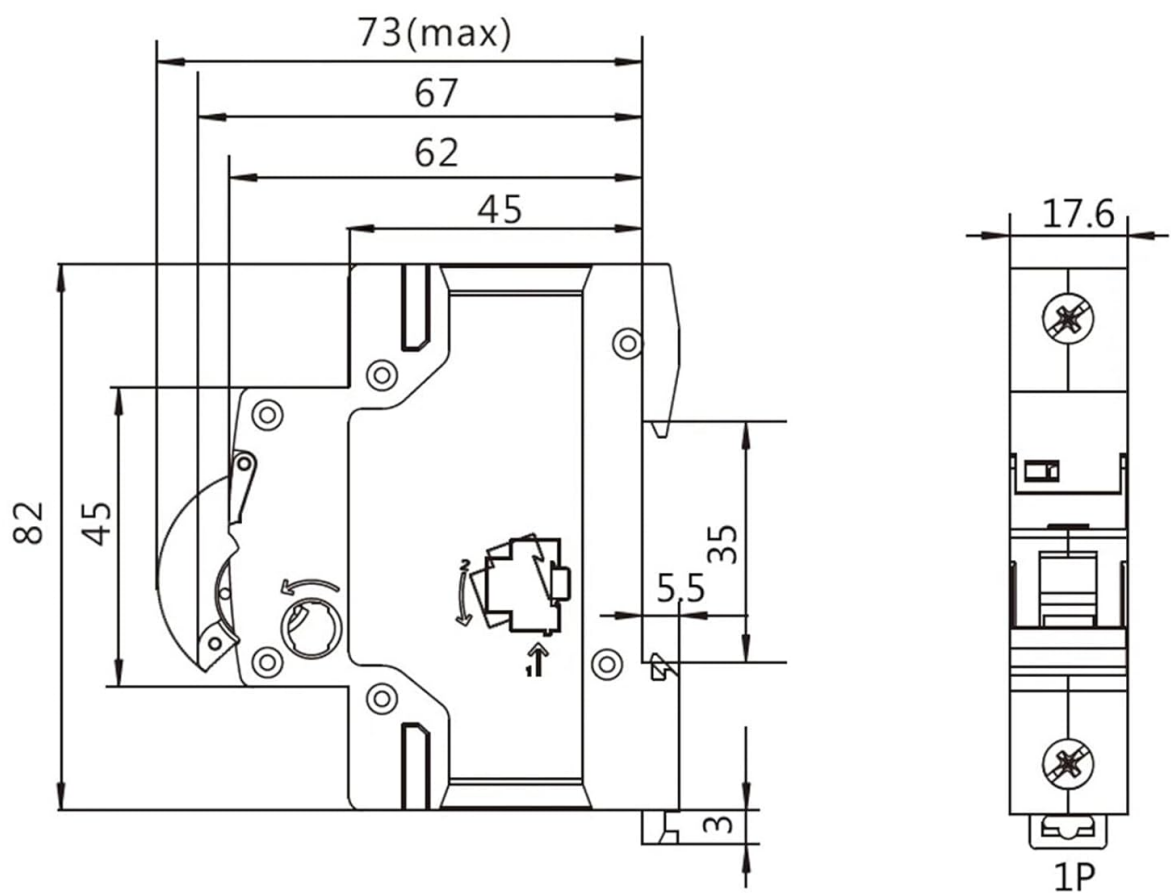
Detailed mounting and dimension diagram, showing measurements in millimeters.
